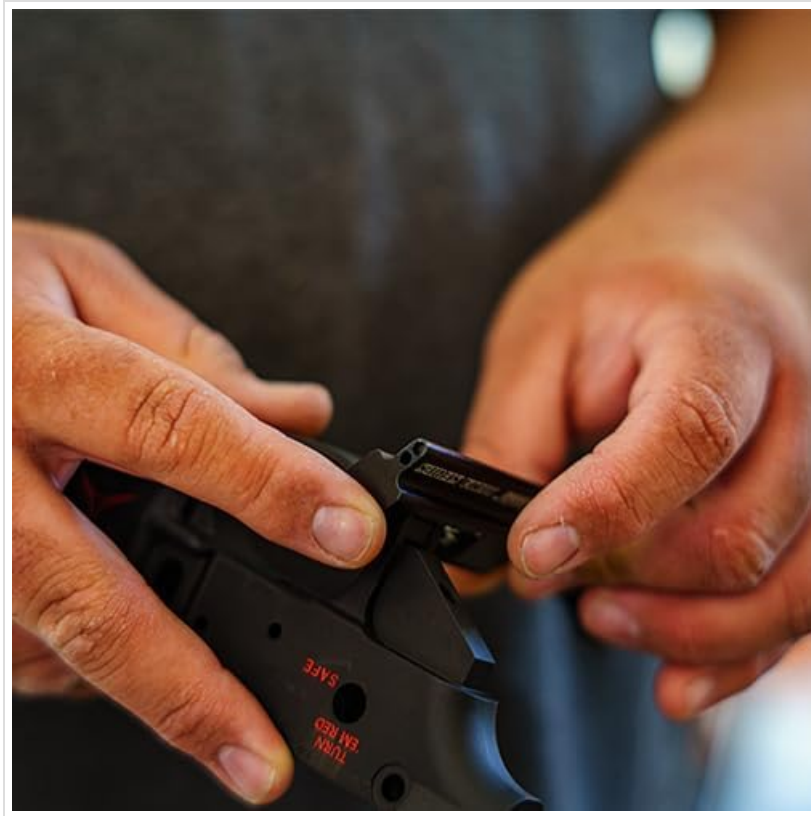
A close-up view of hands using the Wheeler Trigger Guard Install Tool to install a trigger guard on a firearm's lower receiver, demonstrating the tool's compact size and ease of use.
